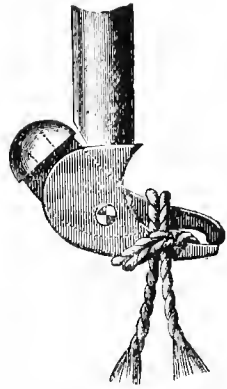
Jaws closed on string; the string-knife then cuts the ends, and the lever draws the string off, completing the knot.
